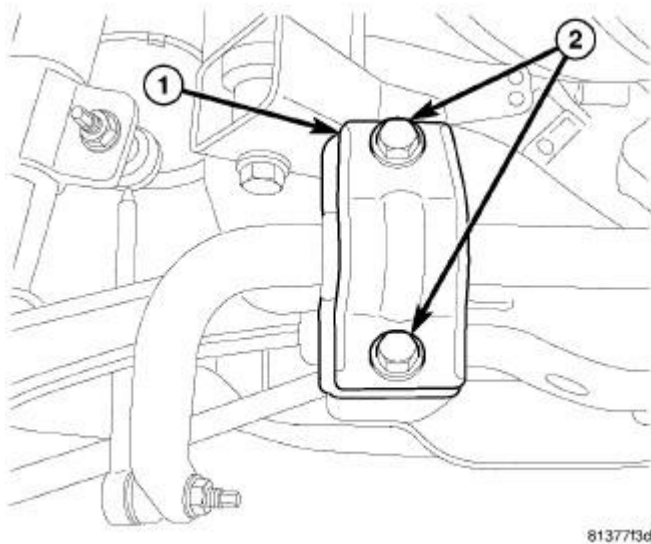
FRONT STABILIZER BAR BUSHING RETAINER BOLTS
